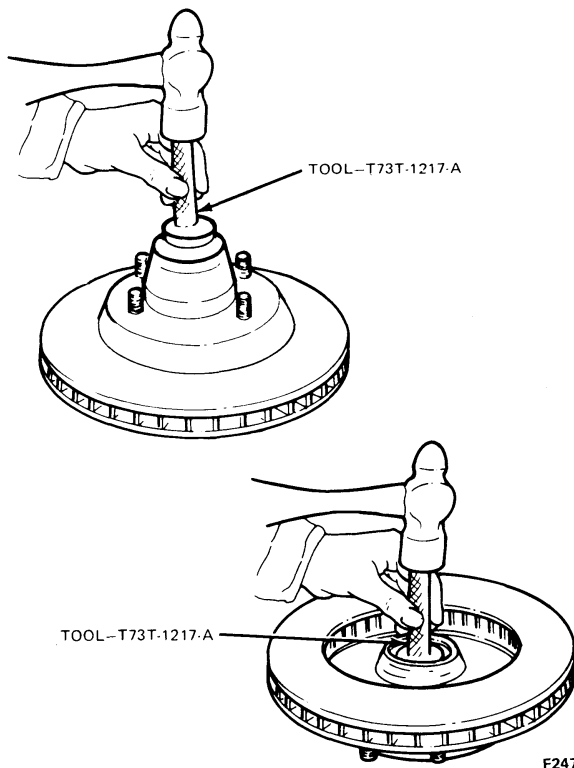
Installing Bearing Cups—2-Wheel Drive
